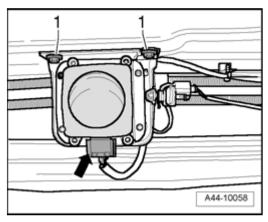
Identifying Harness Connector And Hex Bolts Courtesy of VOLKSWAGEN UNITED STATES, INC.
